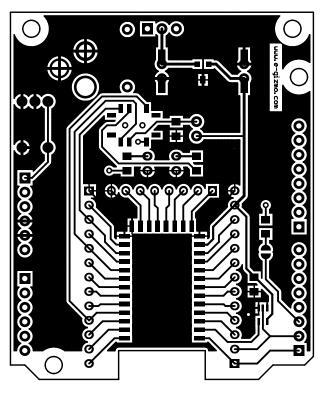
Bluetooth Shield PCB Copper Pattern (Top Layer)
